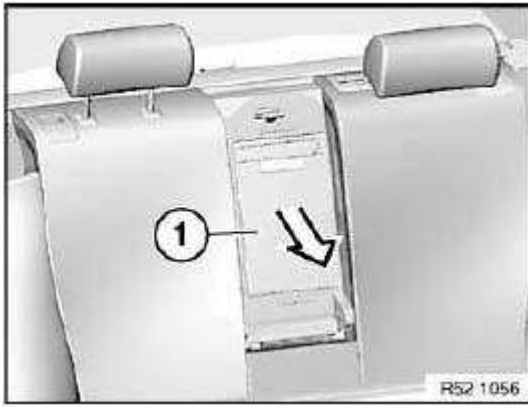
Pressing Ski Bag On Rear Side Out Of Backrest
